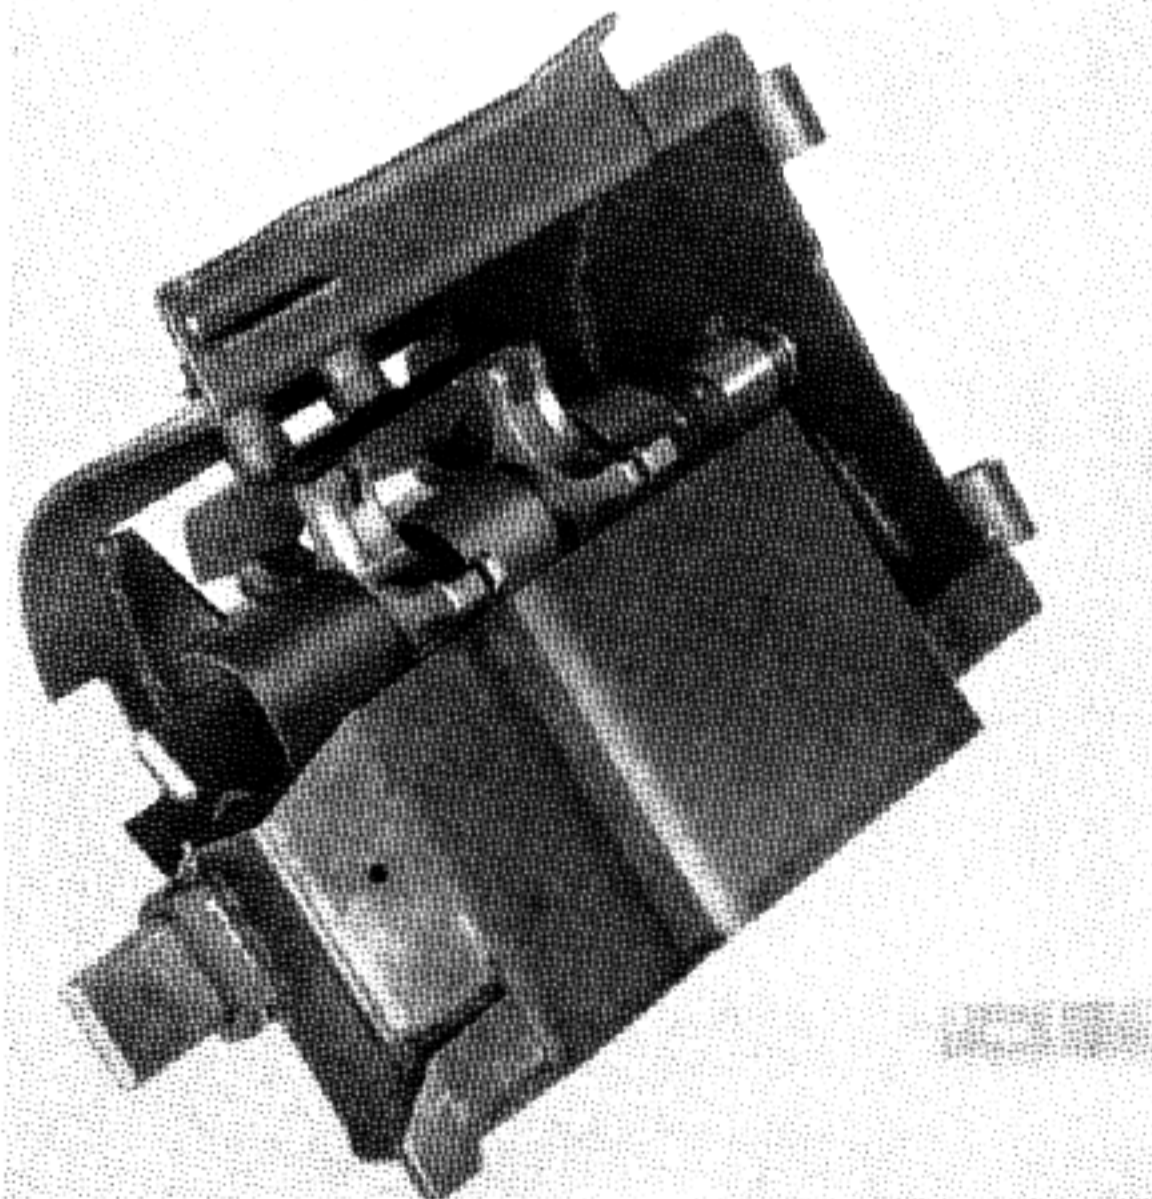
Feed mechanism of 30-mm British Aden Gun. Bottom view showing feed sprockets and link chute guide.
